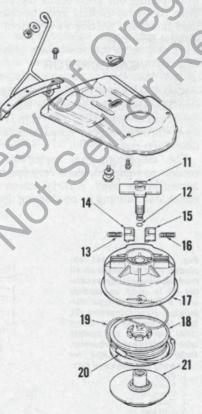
Exploded view of lower head on Model ST-80. Models ST-100 and ST-120 are similar.
